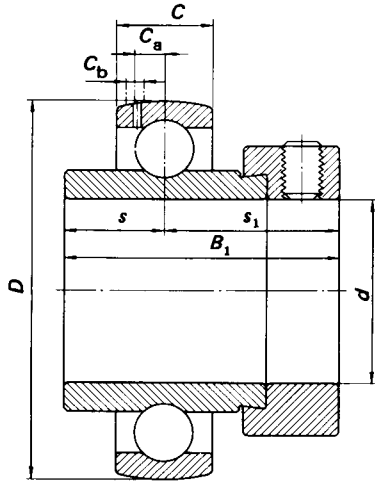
Bearing with eccentric locking collar – Wide overall width
